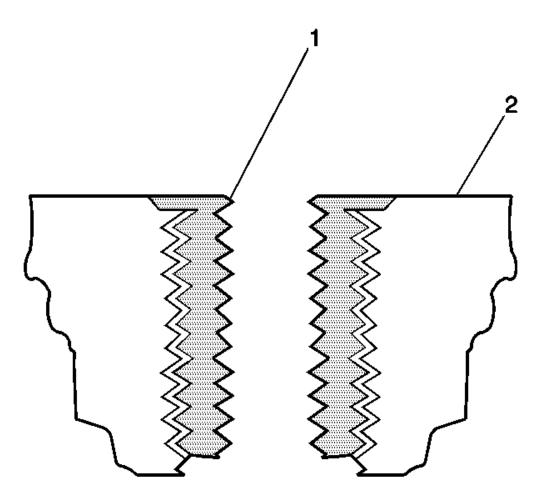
Installing Insert Into Tapped Bolt Hole Courtesy of GENERAL MOTORS CORP.
